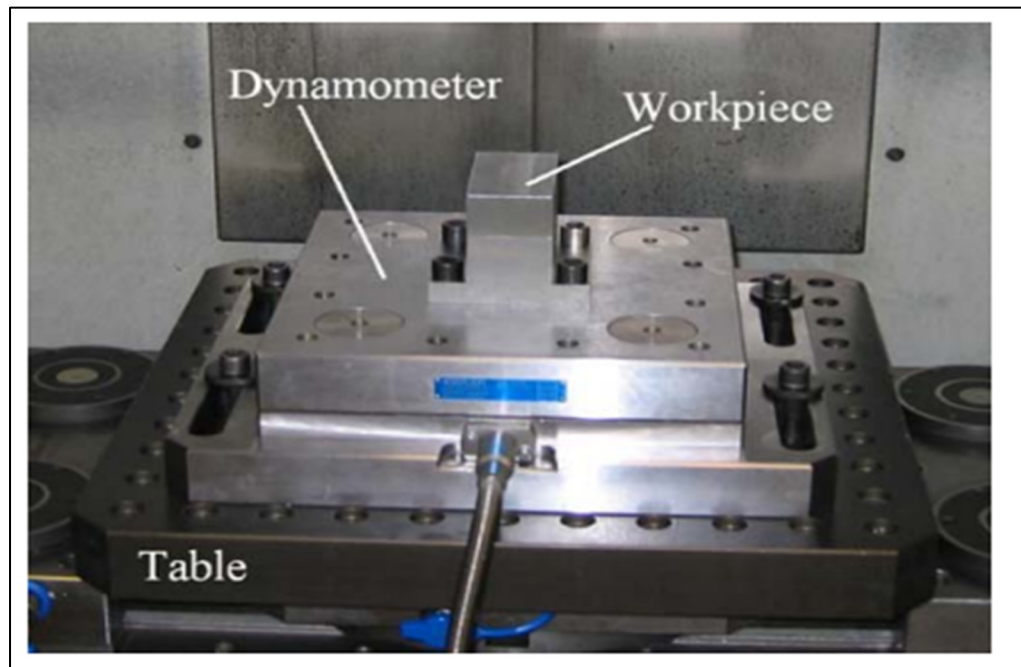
Workpiece mounted on the Kistler 9255B three-axis dynamometer
